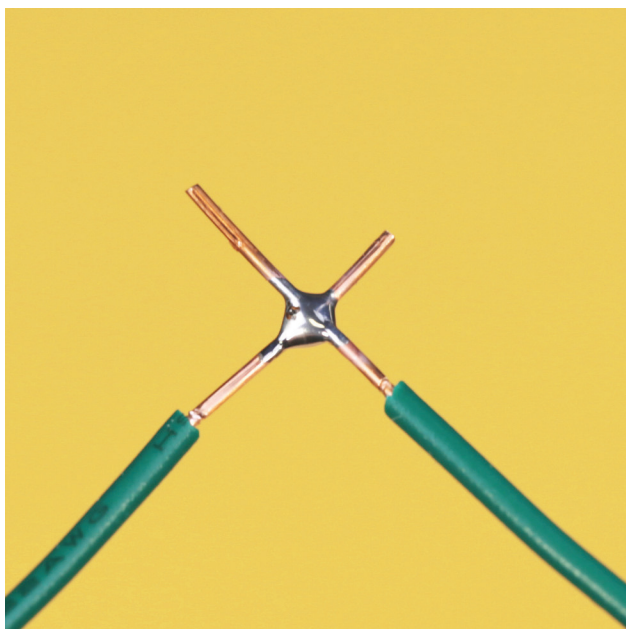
The solder forms a shiny blob that clings to the wires.
